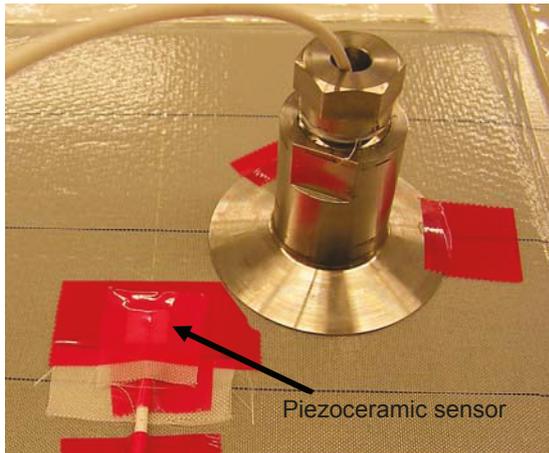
Sensor integration of piezoceramics and transducers into vacuum bagging
